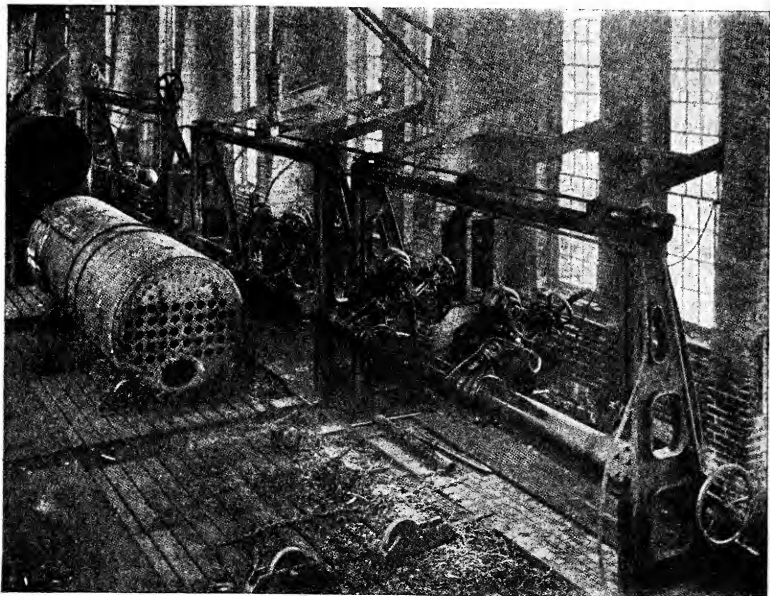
View in shop of Pennsylvania Boiler Works, showing battery of rivet hole drilling machines designed for drilling rivet holes out of the solid with all members in place. This is superior to methods which employ punches, and for marine boilers the requirement is that no part of a rivet hole shall be punched.
